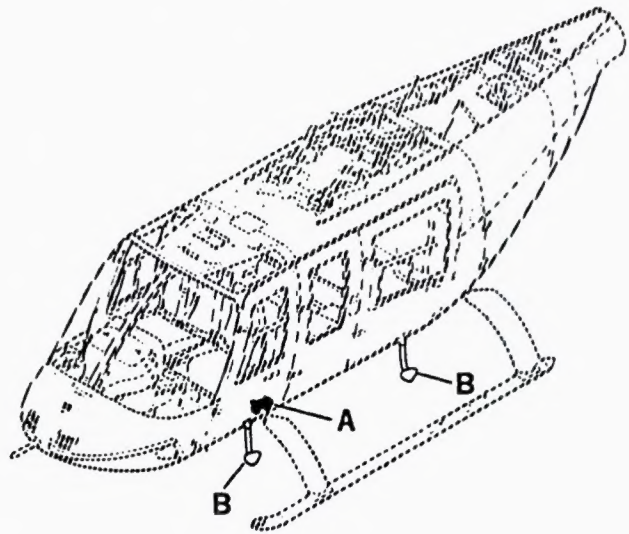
Skid gear kit, high and low; support, landing gear, aft (S/N 45004 thru SUB, 4660 SUB)
